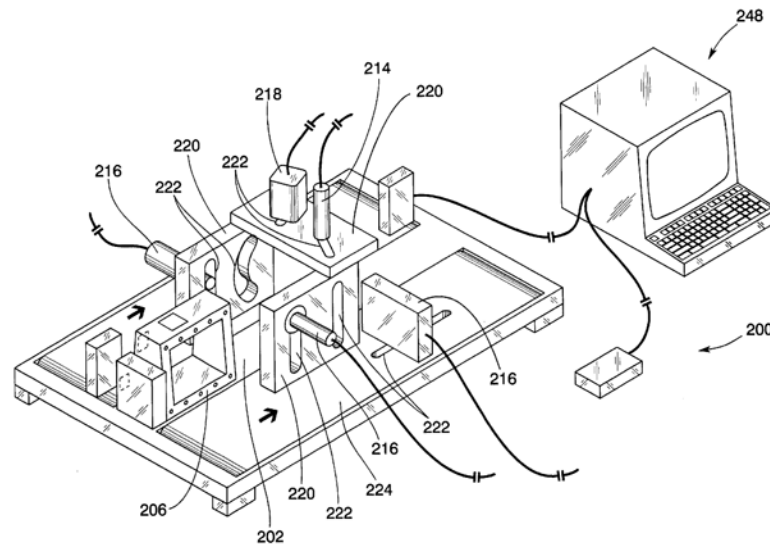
A design for a reconfigurable inspection system [27].
